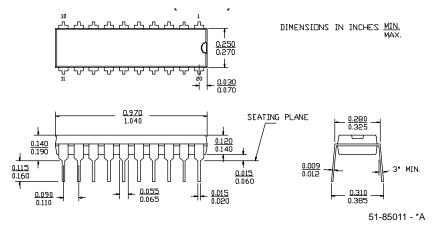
20-Lead (300-Mil) Molded DIP
